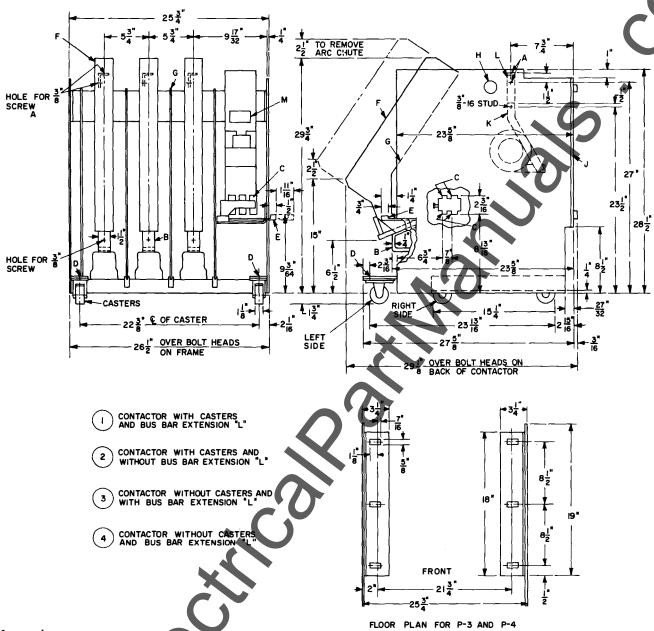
Dimensions, in inches, of IC2814-X111 high-voltage contactor
